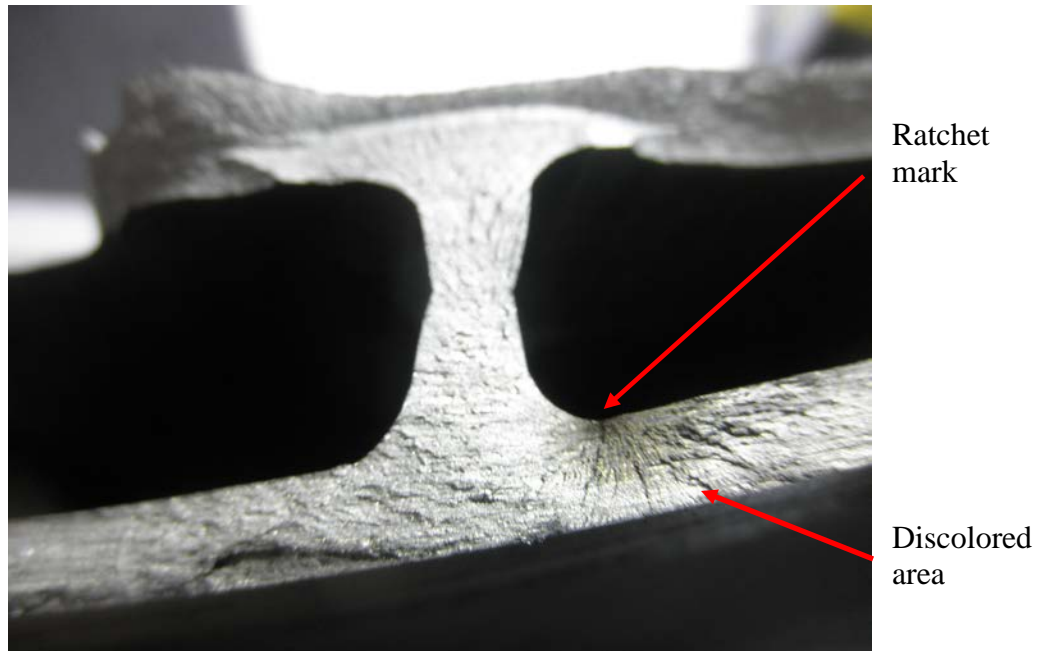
Close up view of fracture surface showing discolored area and ratchet mark radiating from an interior surface of the fan blade.
